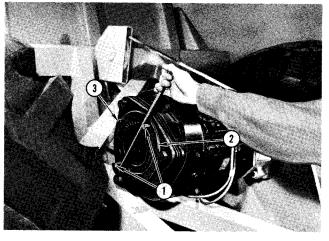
ADJUSTING MOTOR BRAKE 1. Locknut 2. Adjusting Ring 3. Bar
